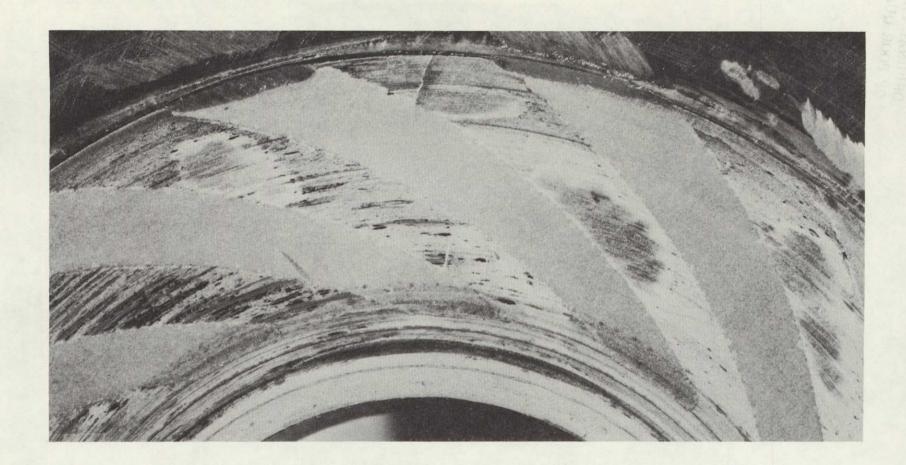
Spiral Groove LOX Seal Mating Ring (C28-0812-10, S/N 03, Build 14, Posttest 749)
